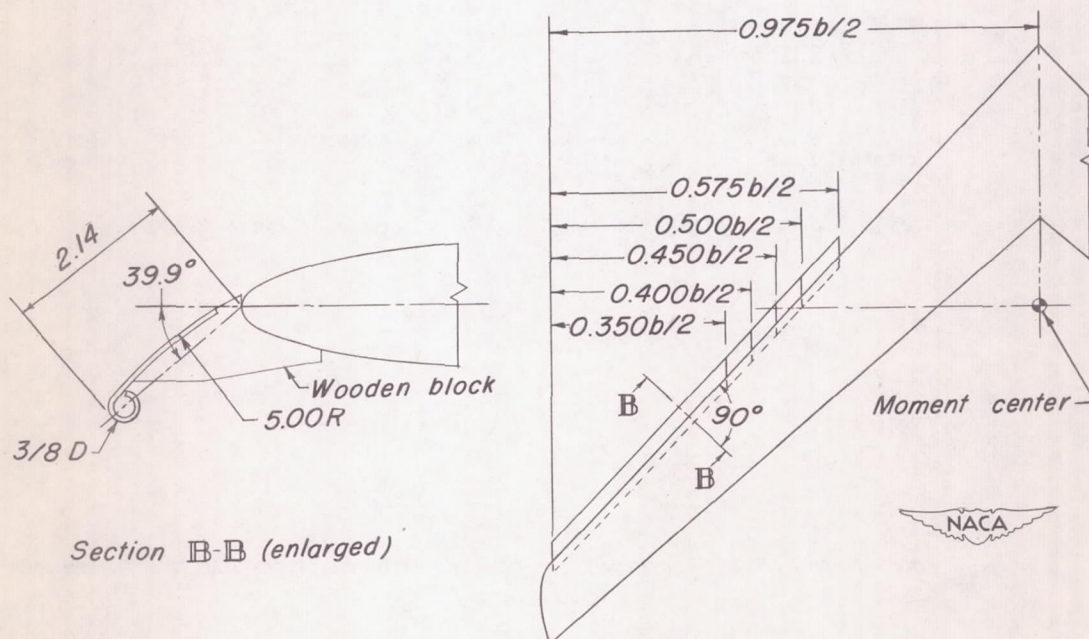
Principal dimensions of wing with fuselage. (Dimensions are in inches.)
